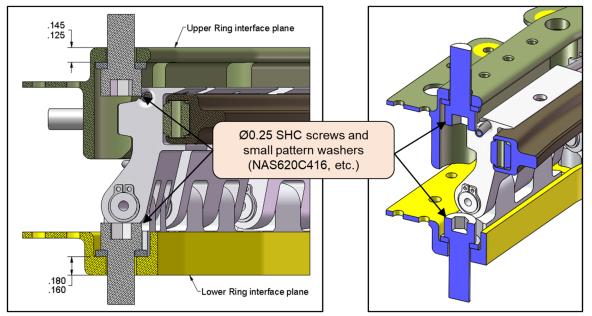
0.25 inch fasteners from MLB to adjoining structures
